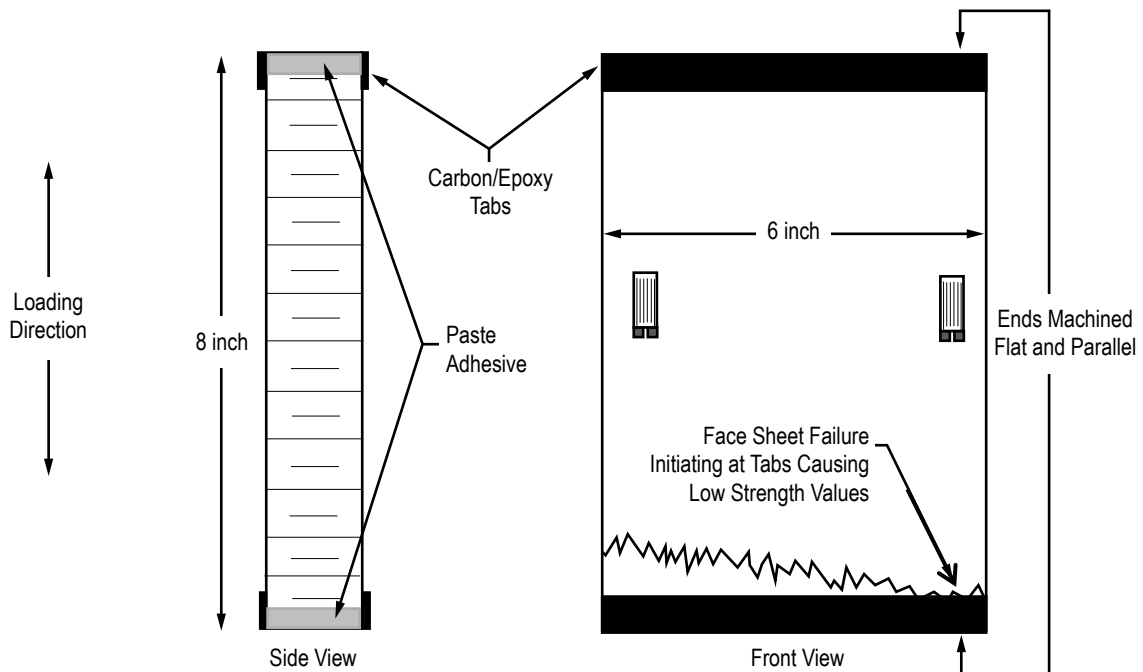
Schematic of carbon/epoxy tabs causing premature face sheet compression failures.
